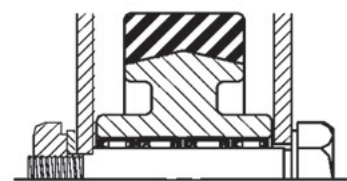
Clutch and bearing arrangement for heavy loads
